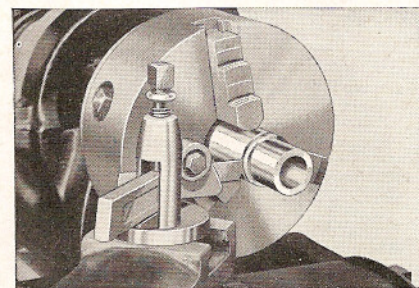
Making a Bushing, Complete Without Removing from the Chuck.
